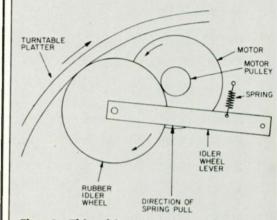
This drive system uses a spring-loaded lever to keep the idler wheel in contact with the motor pulley and the platter rim.
